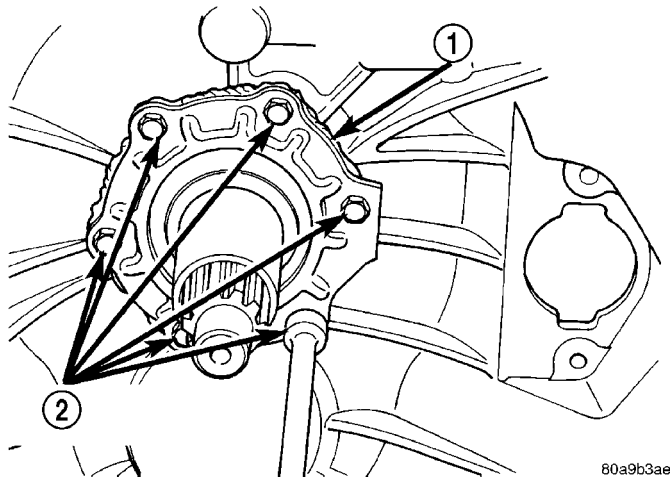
BEARING RETAINER BOLTS - TYPICAL
